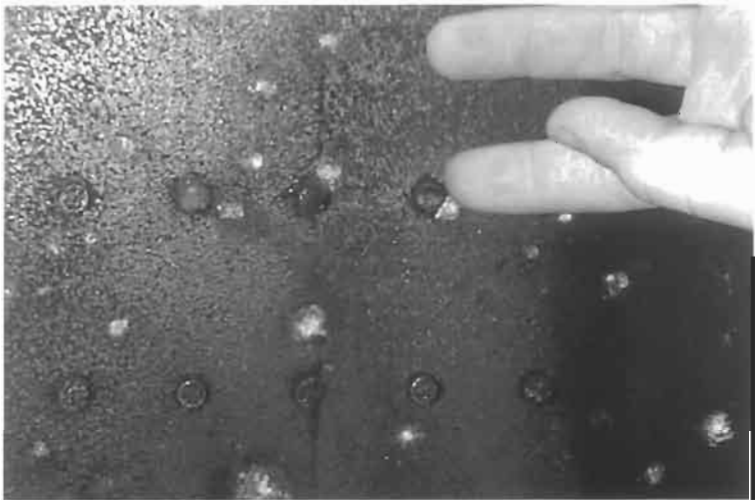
Corrosion pitting damage in the lower wing skin of a C-130 aircraft after initial cleanup note pitting extending under the fastener head.
